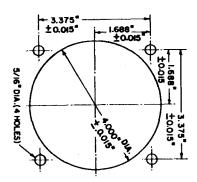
Cut-out and panel-drilling dimensions for wattmeter
